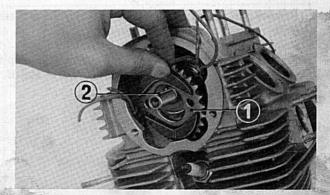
(1) Cam sprocket (2) Camshaft
